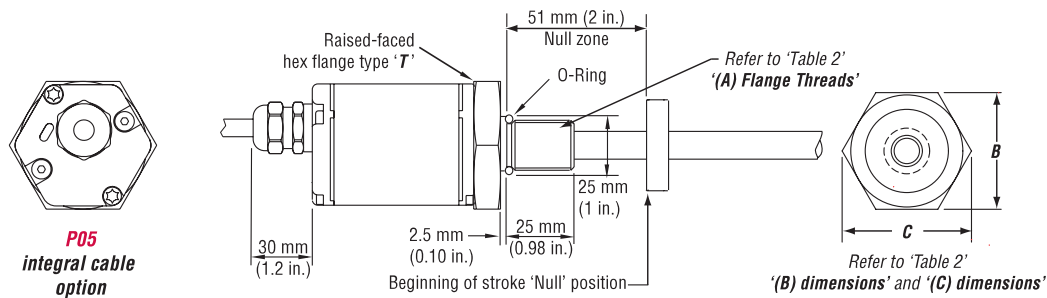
Model RH Rod-style sensor dimension reference (shown with P05 integral cable option)
